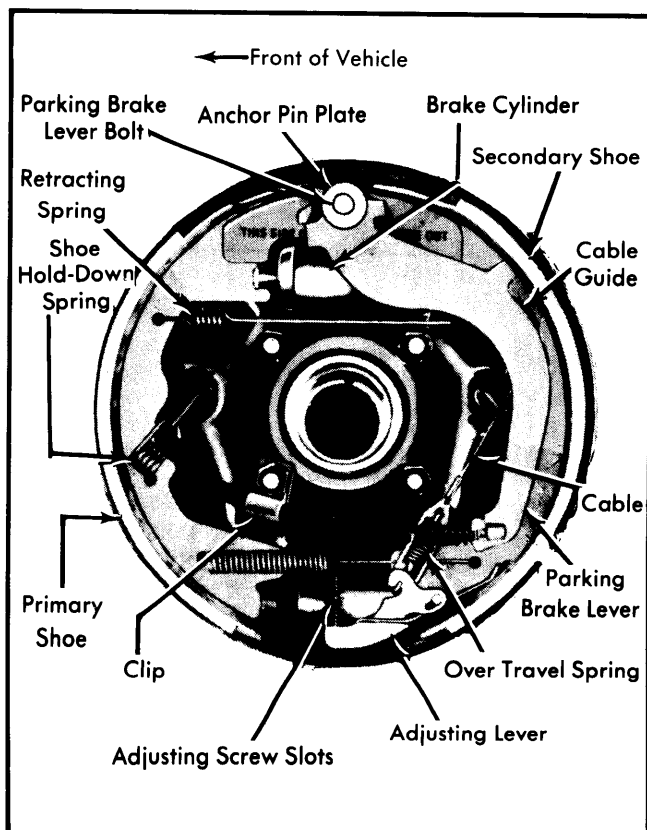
Ford Rear Brake Assembly (E & F250/350 Models)
